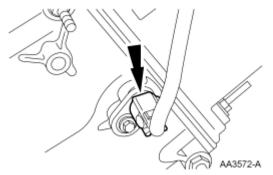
Ignition Coil Electrical Connectors Courtesy of FORD MOTOR CO.
